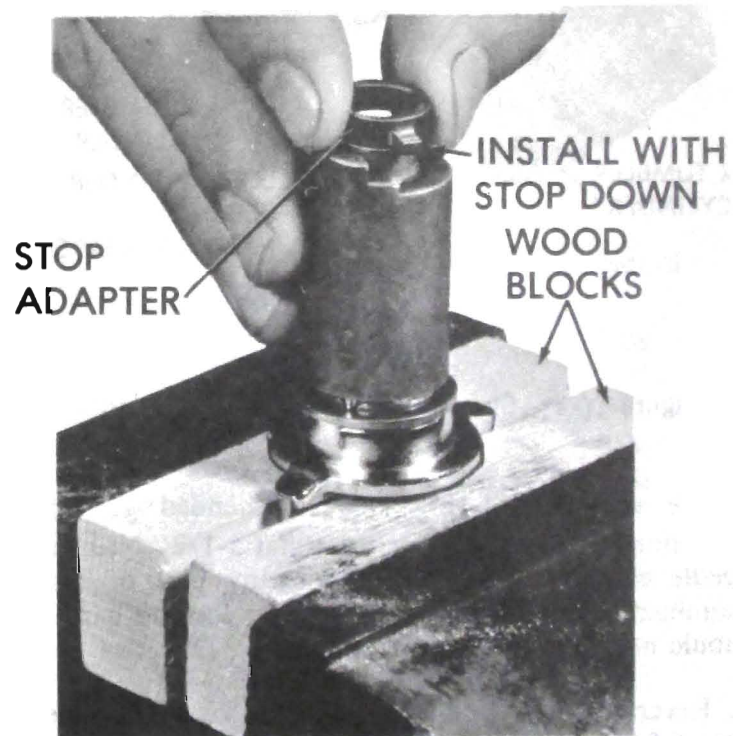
Installing Stop Adapter on Lock Cylinder
